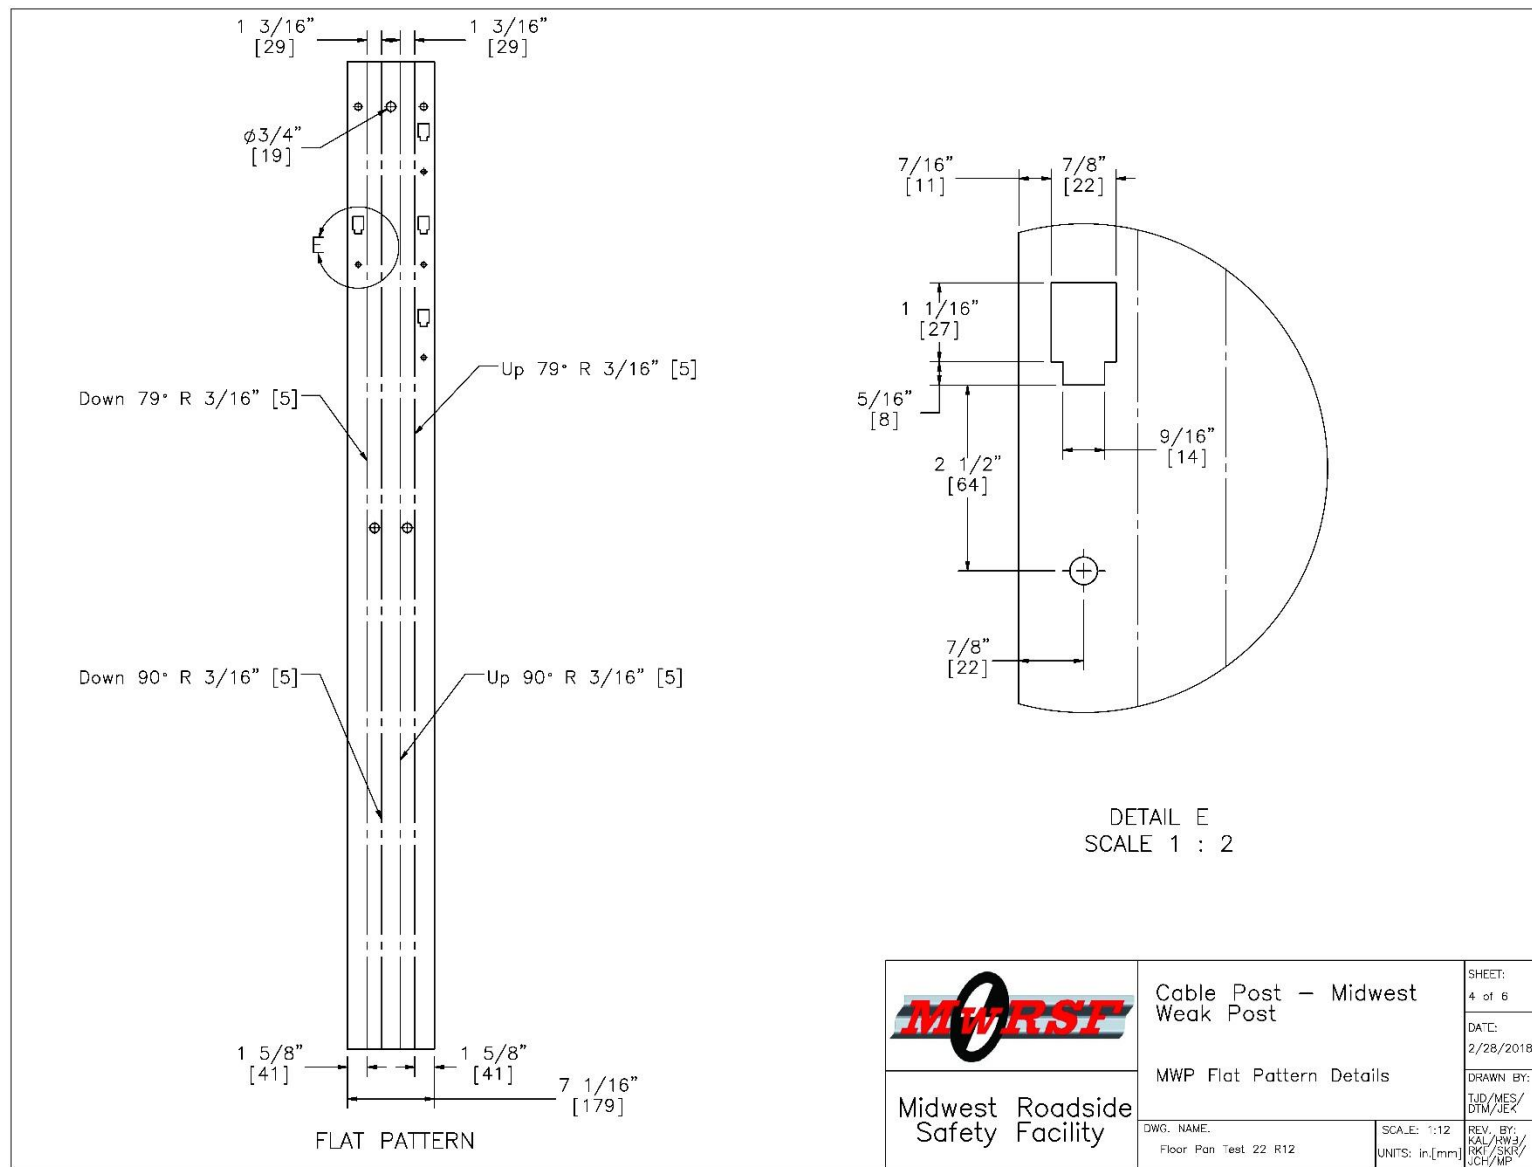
MWP Flat Pattern Details, Test No. MWFP-22
